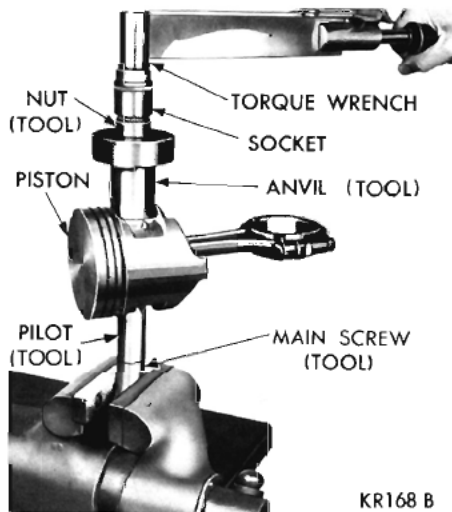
Testing Fit of Piston Pin in Connecting Rod Tool C-3684
